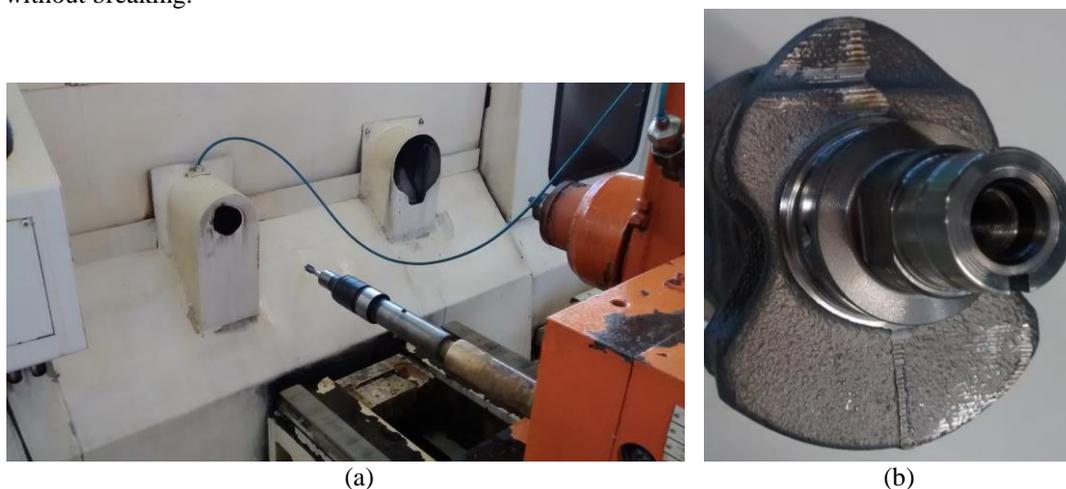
(a) Cores used to make the threads; (b) Crankshafts used in tests, highlighting the blind hole which the thread will be performed.
